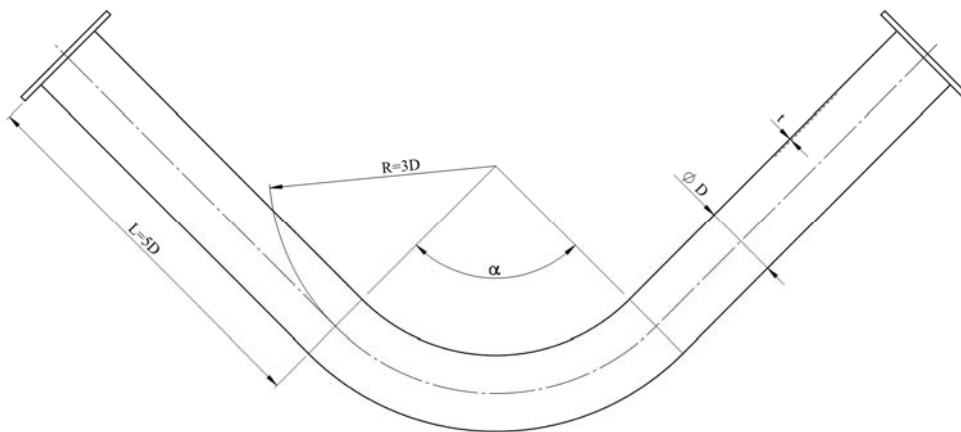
Overall dimensions of the elbow specimens [5].
